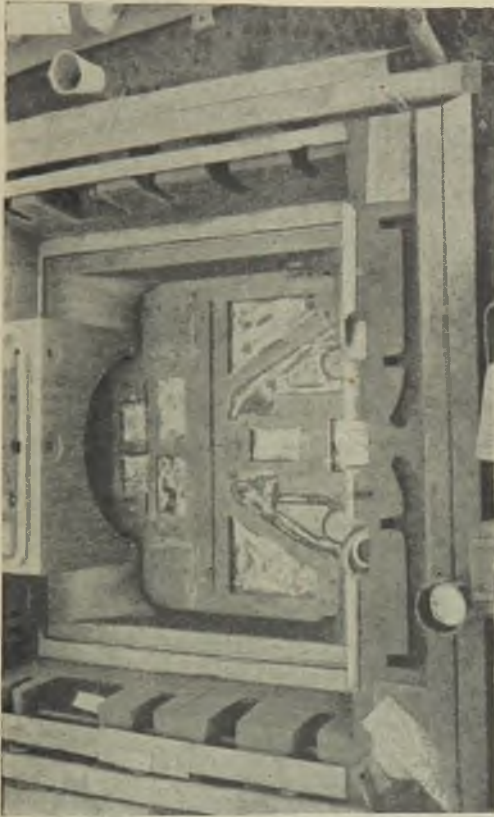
SHOWS VIEW OF MOULD AFTER FINISHING
